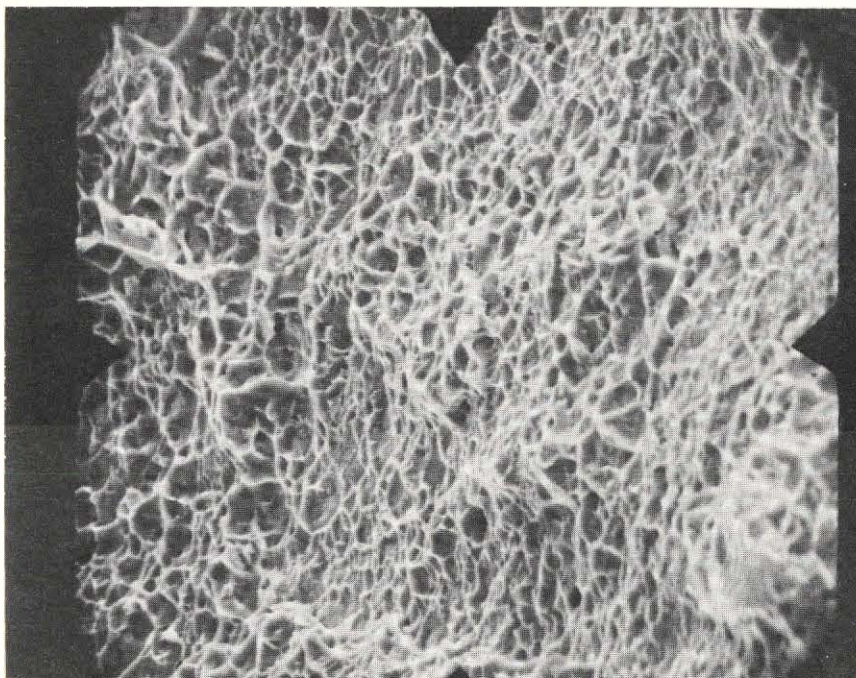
Fracture surface of aged Ti-8Al-1Mo-1V
